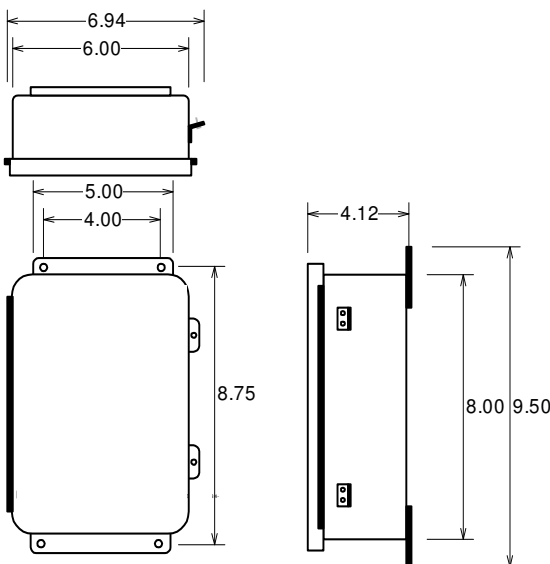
BC-1 Interface Unit Outline and Dimensions
